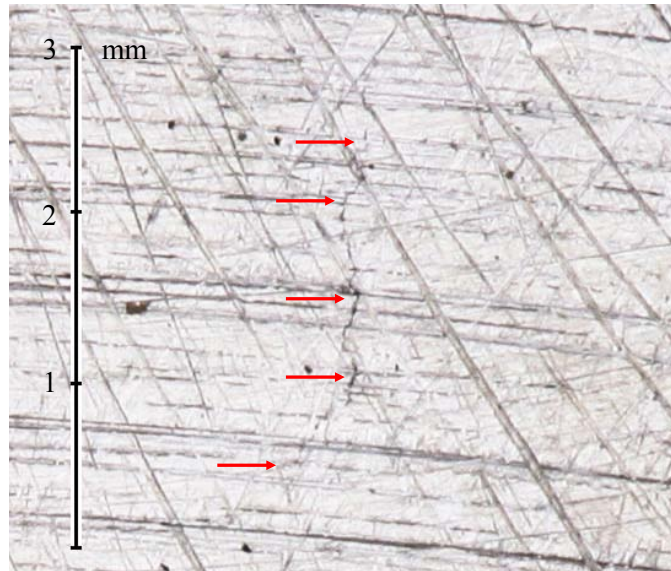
Weld Solidification Crack in Test Block 5.6 at 45 Degrees
